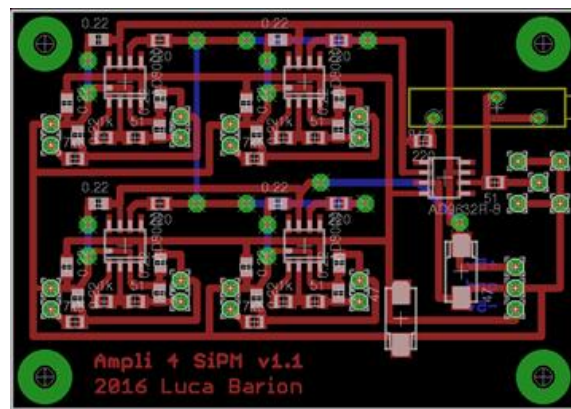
CAD design of SiPMs readout PCB for side veto modules.
